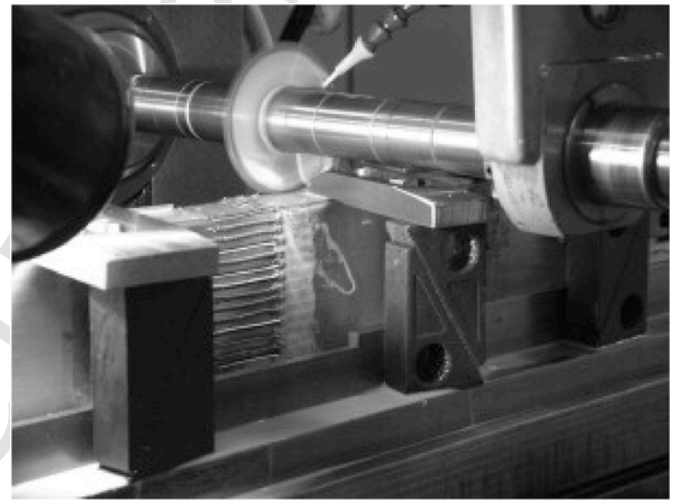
Sectioning of a cold-rolled stainless steel box section [26].
